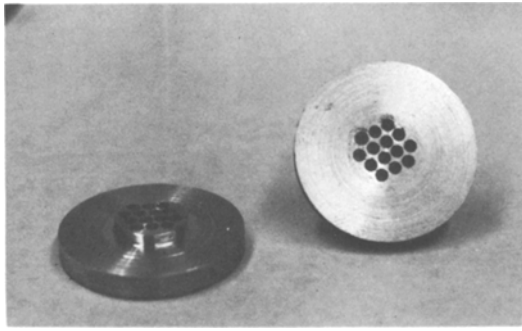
Aluminium guides used to align wires in the mould. The diameter of the flanges is 2.5 mm.
